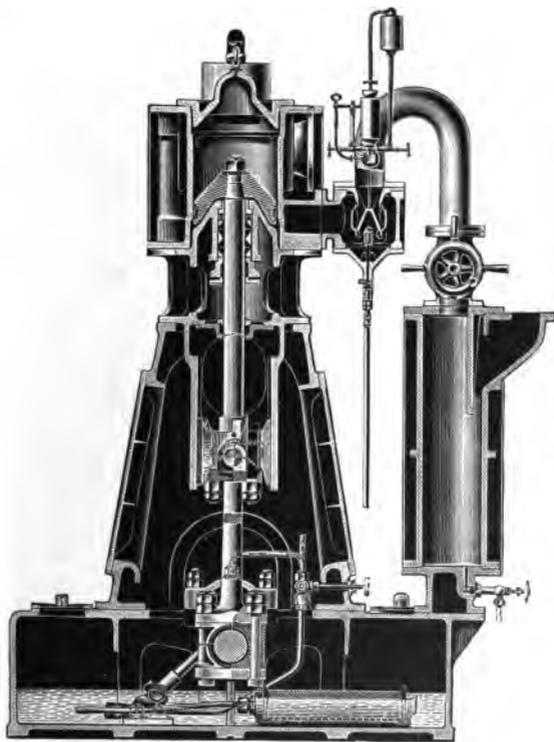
"BELLISS" ENGINE. SECTIONAL END ELEVATION.
